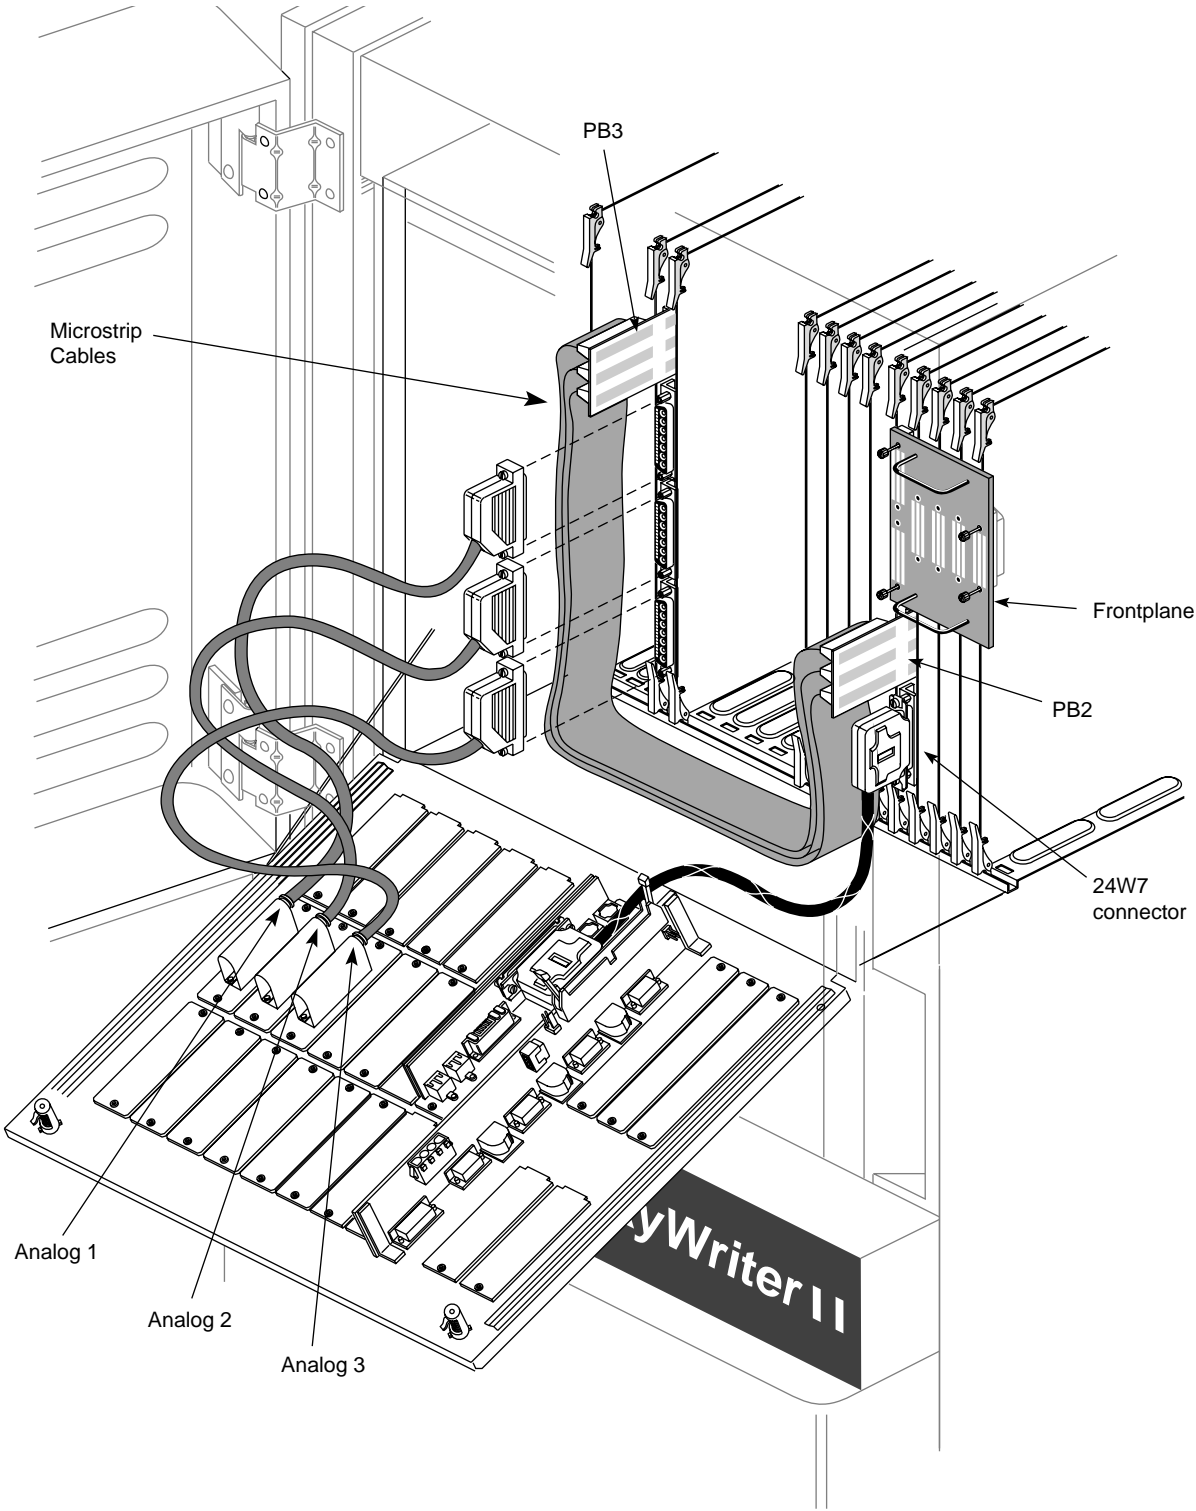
Complete Multi-Channel Option Installation for the SkyWriter Chassis (Breakout Box Version)
